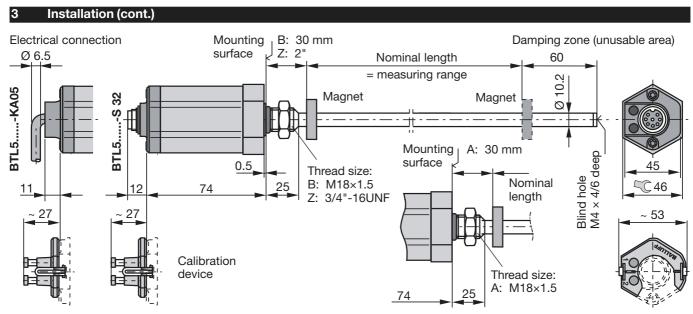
Transducer BTL5...A/B/Z, Dimensions
